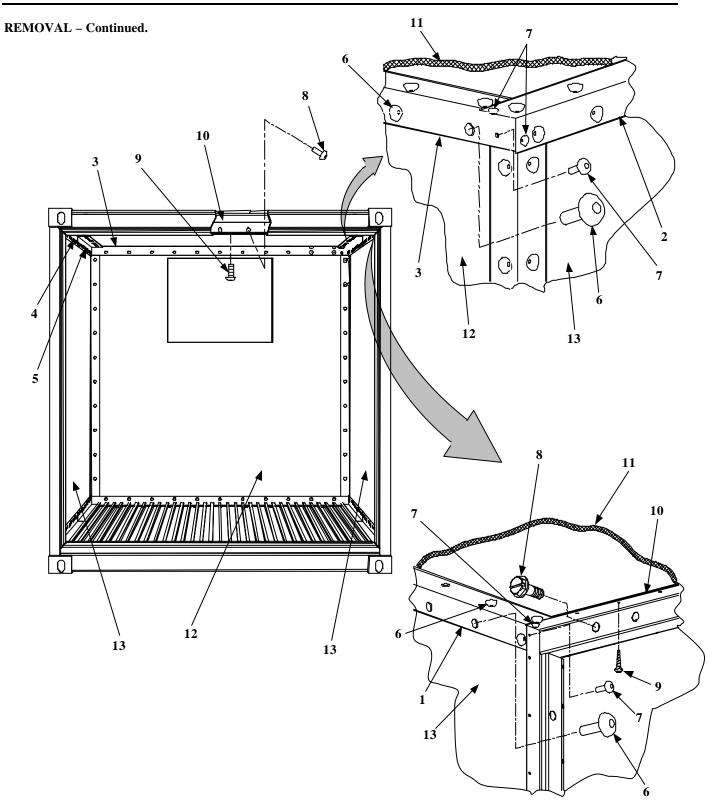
Roof Panel Removal (Sheet 1 of 2)
